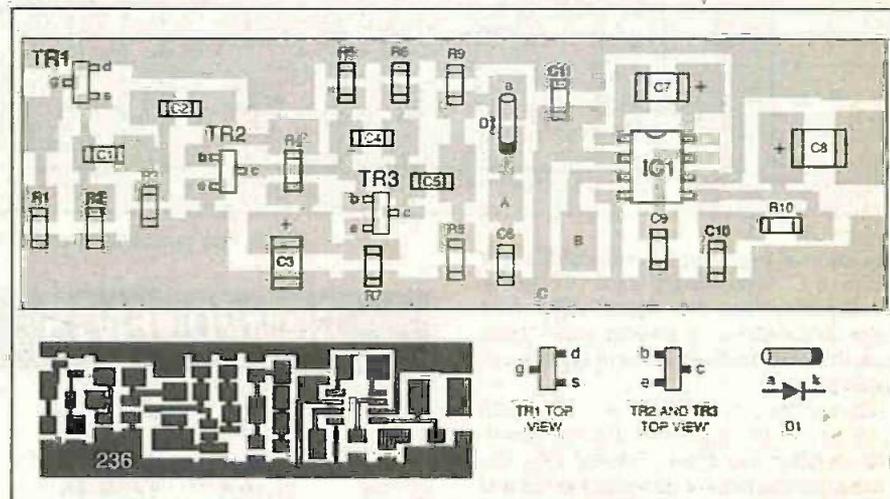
Layout of components on a twice-size surface mount printed circuit board and full size copper foil master pattern. The transistor and diode pinouts are also included.
